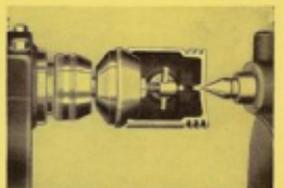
Cross Section View showing Application of the Piston Adapter.
